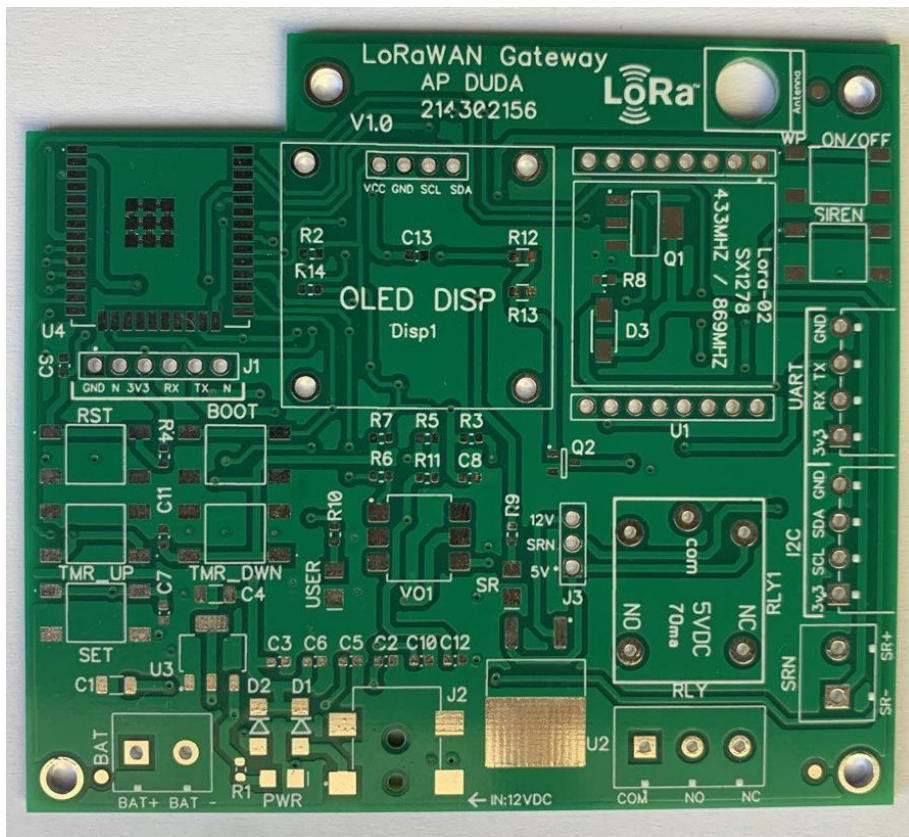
Completed LoRaWAN gateway bare PCB made with FR4, white silk screen and green solder mark.
